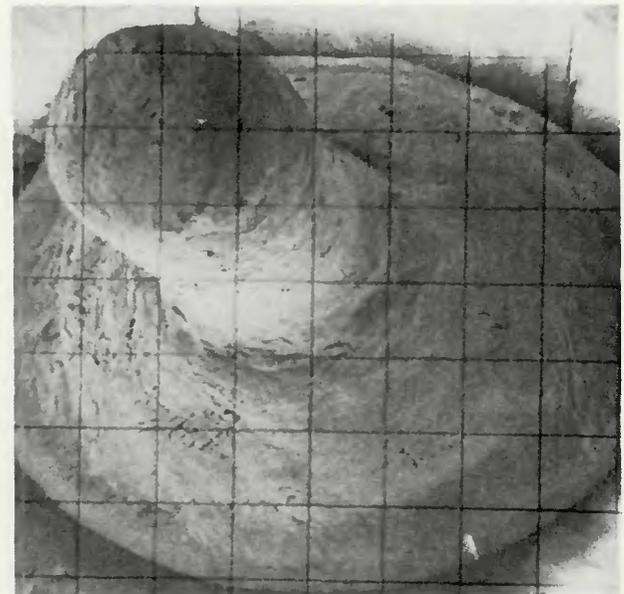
SEM photomicrograph of a typical 90Pb-9Cd-1Zn solder joint after exposure to 500 thermal fatigue cycles. No evidence of cracking or pad-to-solder alloy separation.  $\times 50$
